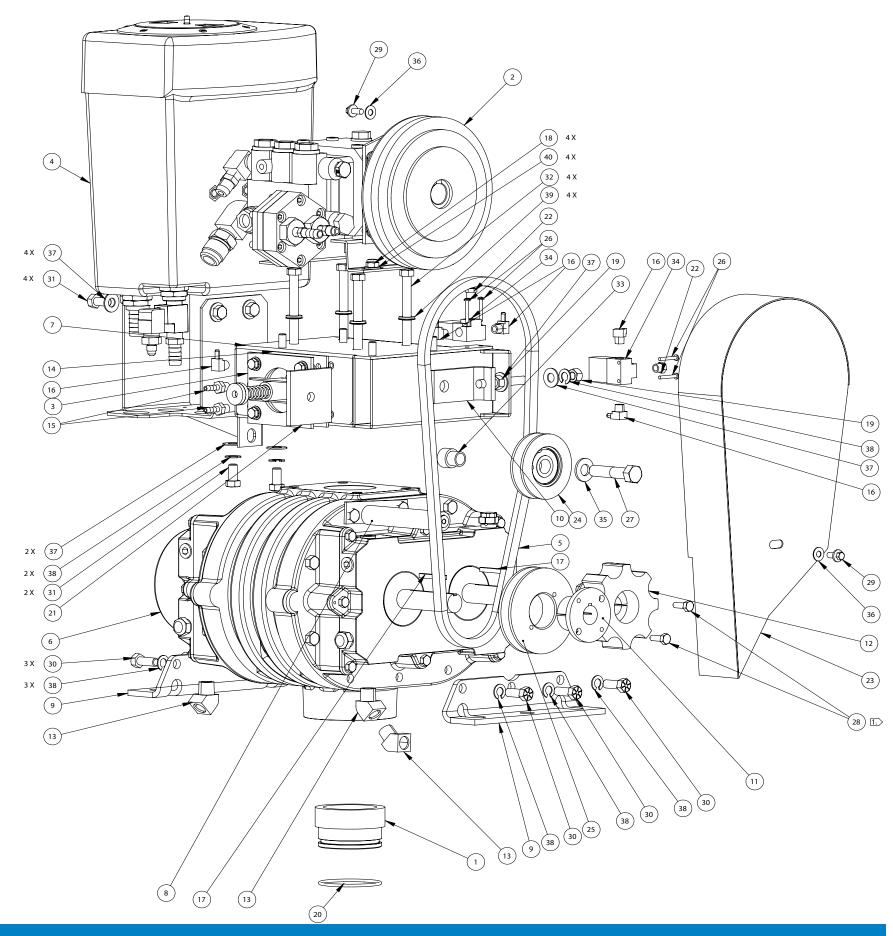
Blower Assembly 610-002-720 Rev. G
